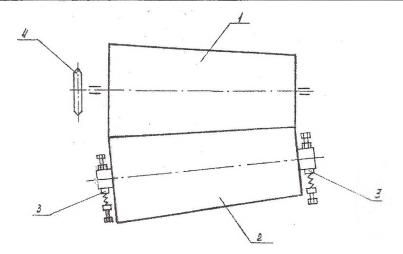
The scheme of flax stem crushing apparatus AP-1A: 1 – upper leading roller; 2 – bottom squeezing roller; 3 - squeezing device; 4 - gear
